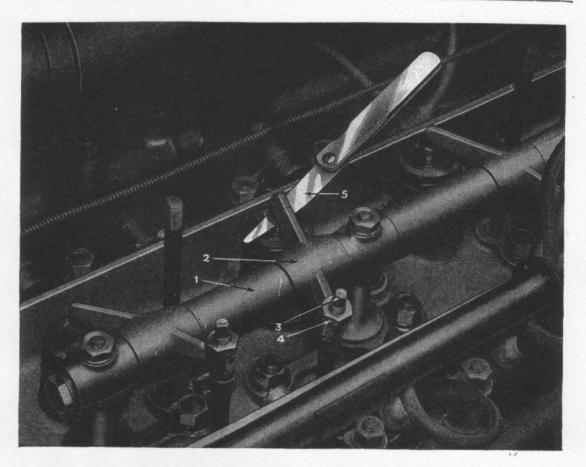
ADJUSTING THE INLET VALVE ROCKER CLEARANCES.
